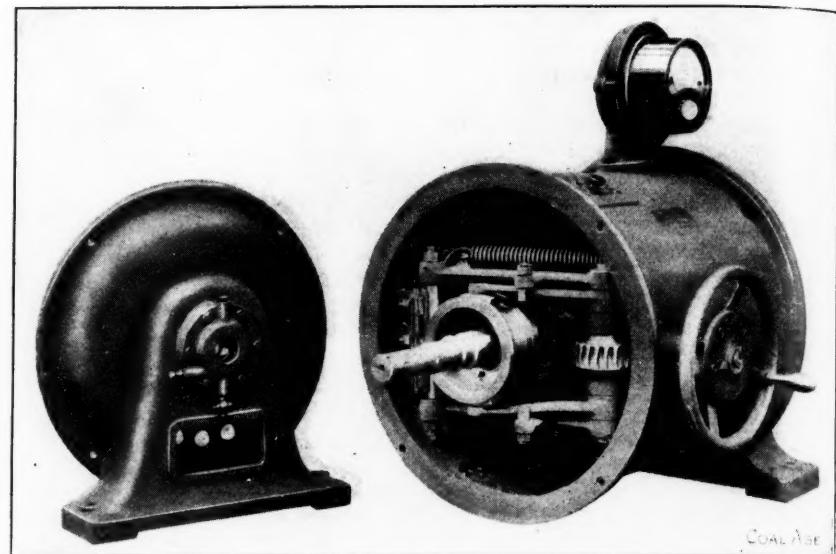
MOTOR WITH COLLECTING RINGS BETWEEN BEARINGS AND ROTOR
